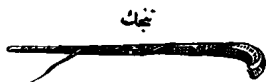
The *tendyek*, a tool for applying pressure between the horn strips and wood foundation while binding the parts together in gluing.
